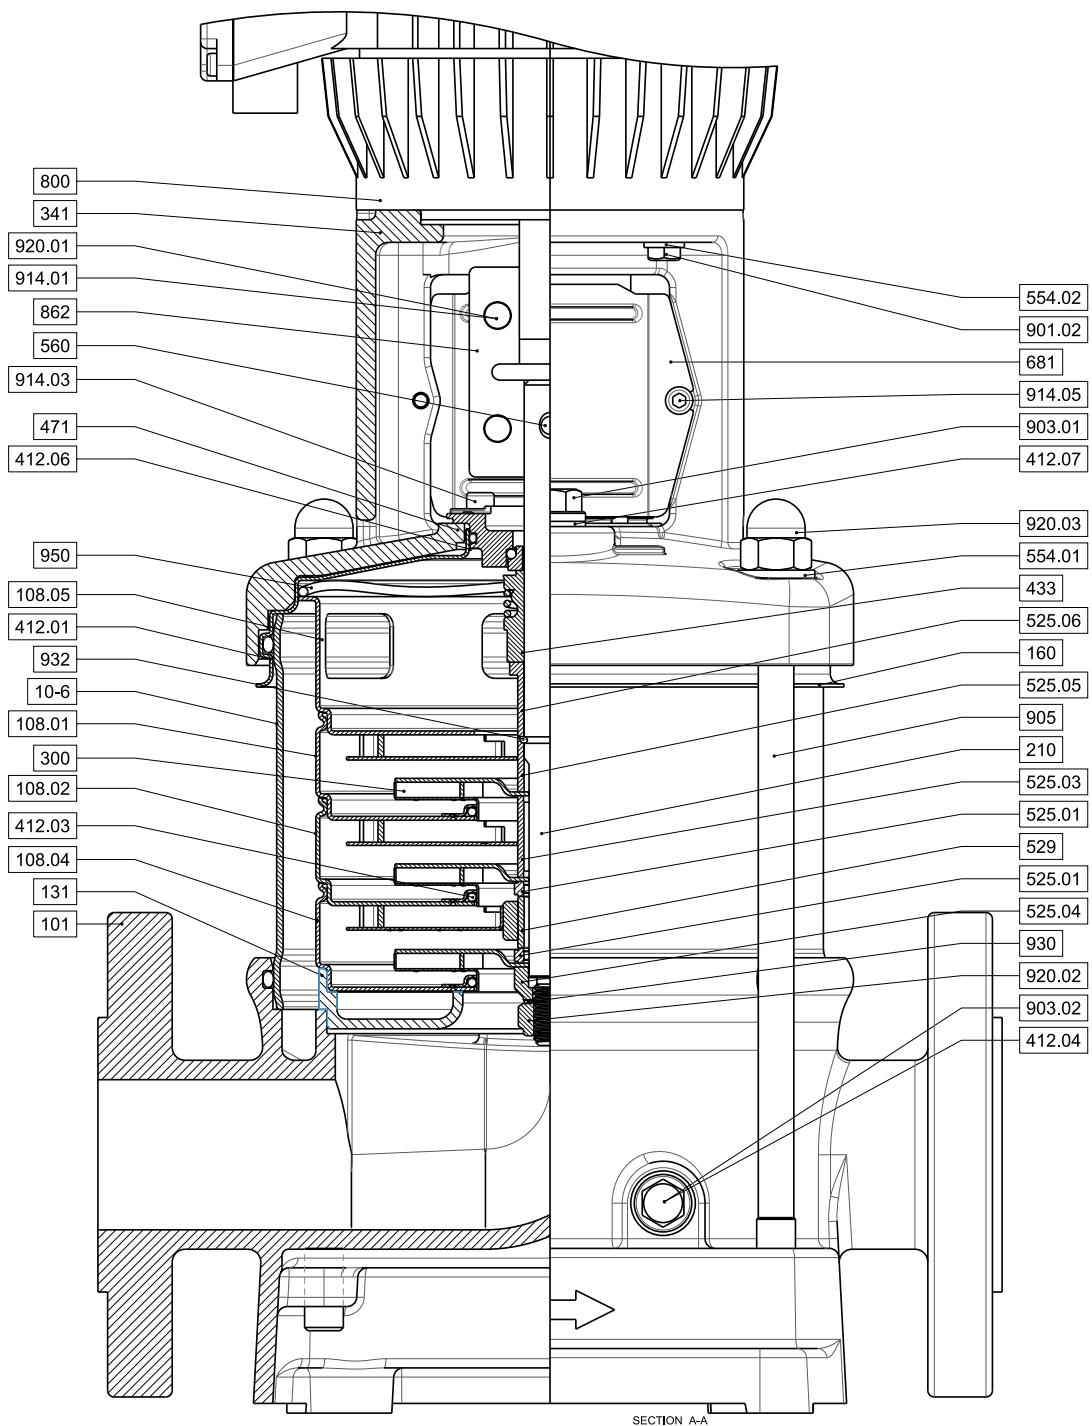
Sectional drawing DPV(S) 2/4/6 B
